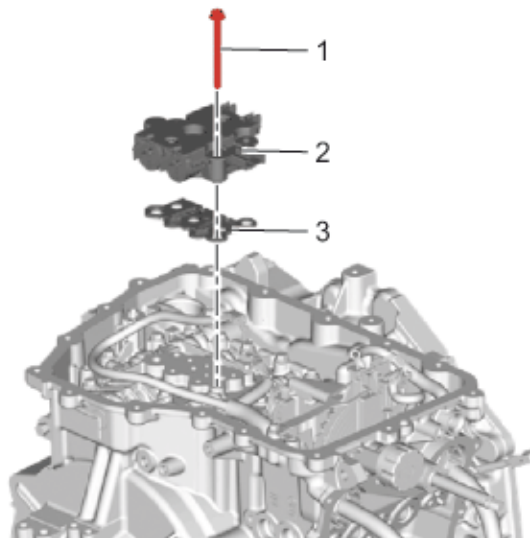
Control Valve Body Bolts, Control Solenoid Valve And Filter Plate
